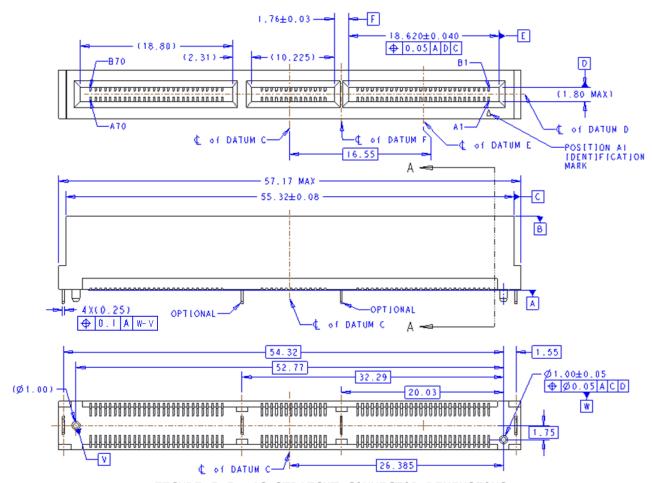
4C STRAIGHT CONNECTOR DIMENSIONS
